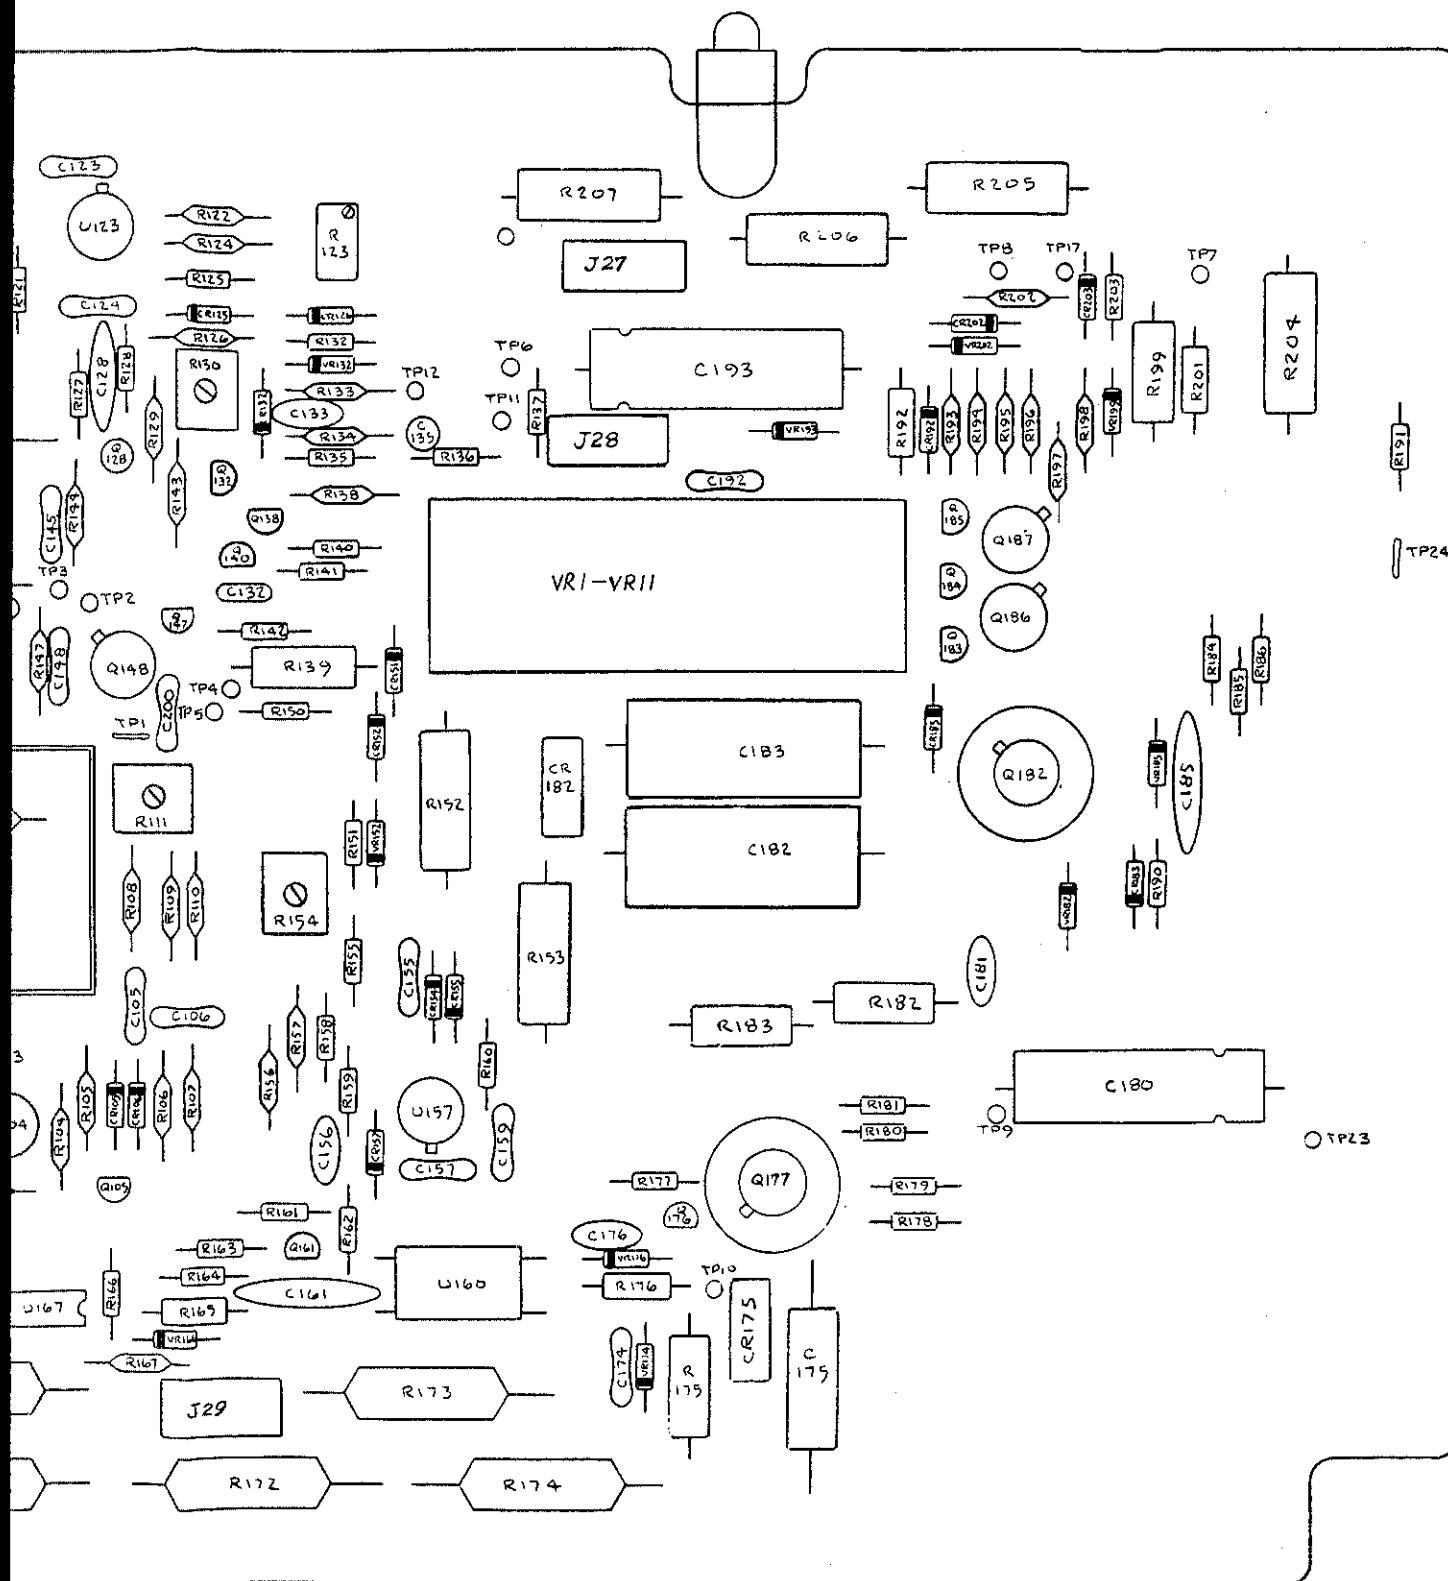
PREAMPLIFIER ASSEMBLY
